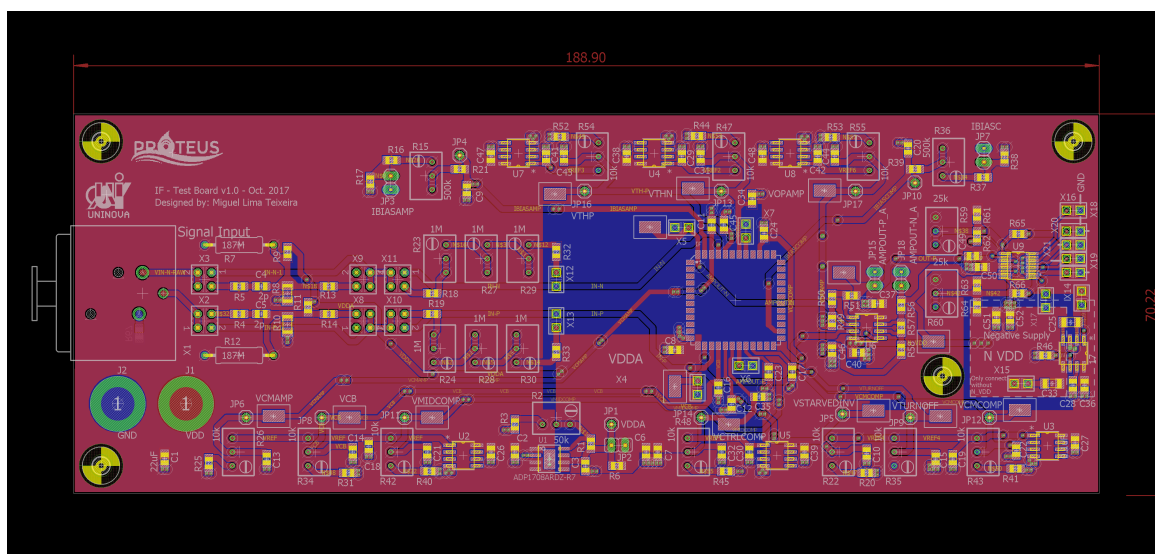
PCB layout of the IFC prototype test board, showing the power planes.
